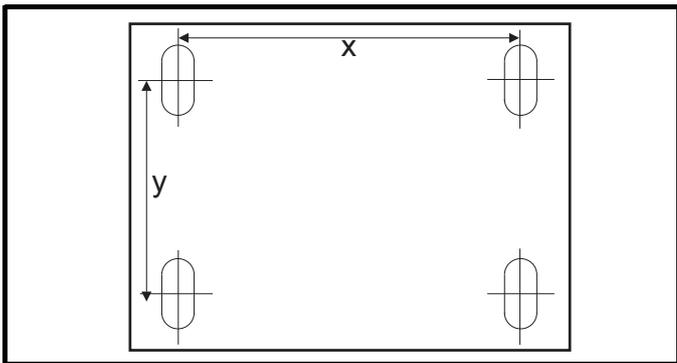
Switching frequency filter inductor type 1 dimensions
